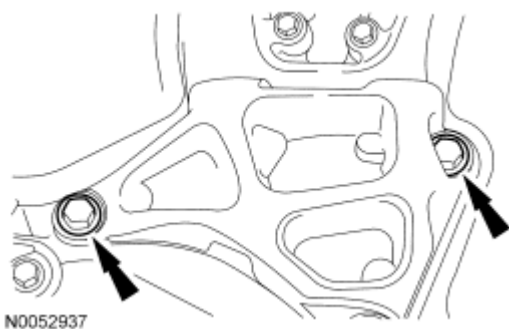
Locating Upper Engine Mount Bracket Bolts
